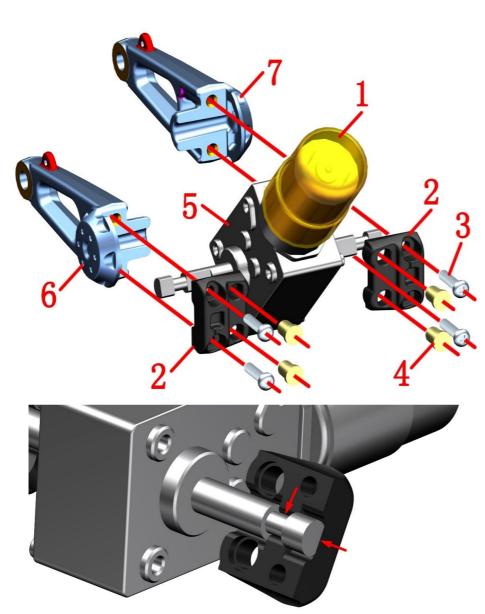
FRONT FORK COMPONENT		Windshield base assembly 2	CHK	401
